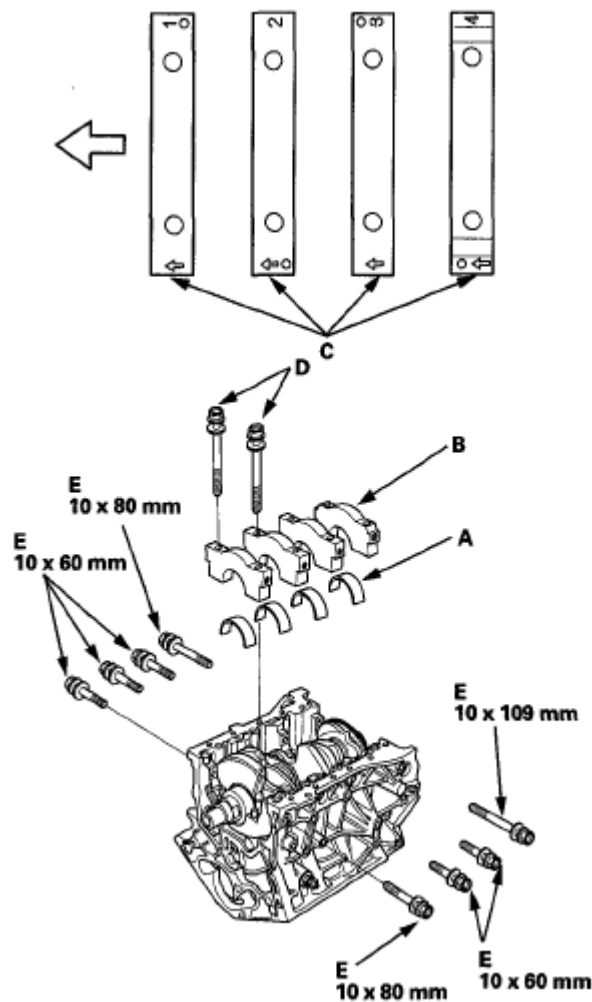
Installing Bearings And Main Bearing Caps With Arrow Facing Timing Belt Side Of Engine Block
